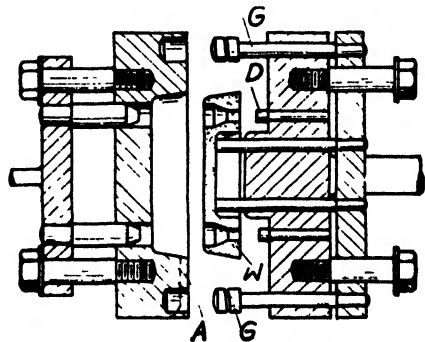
Die-casting Mold Operation—Stage 4.
